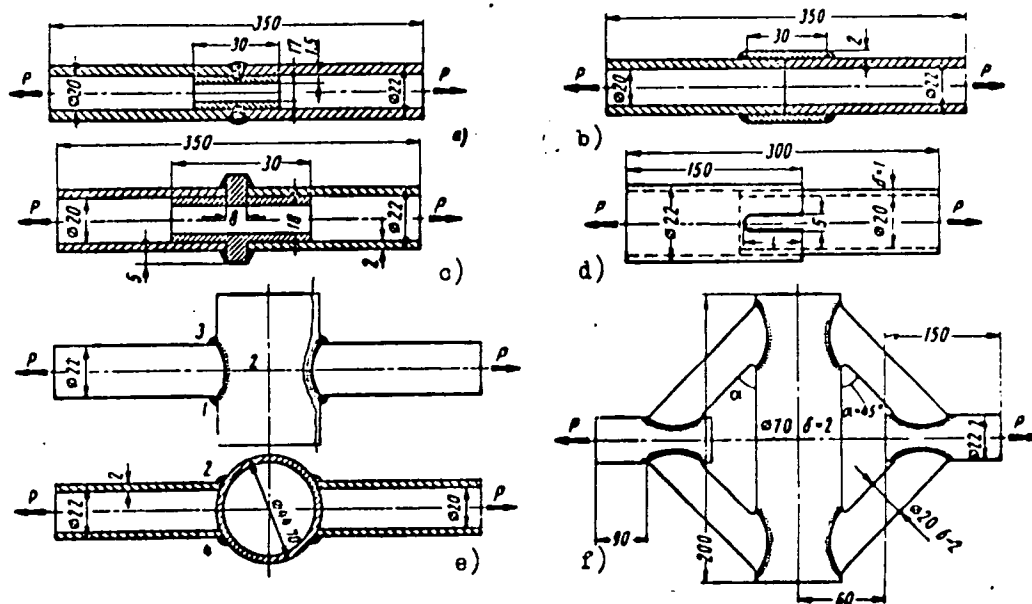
Studied types of welded joints of thin-walled pipes.
